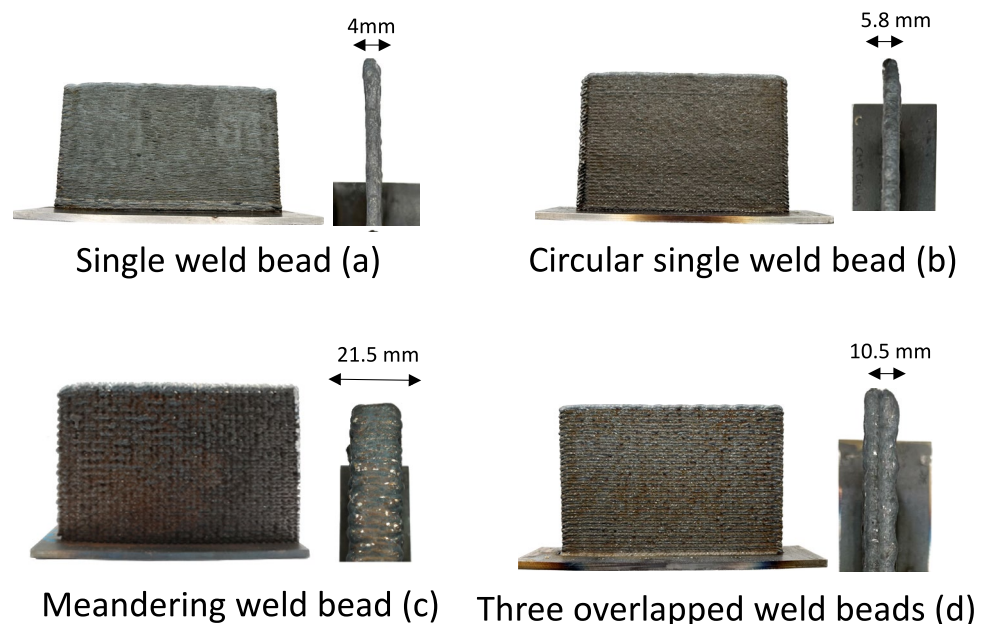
Front view and top view of the manufactured WAAM walls: a single weld bead, b circular single weld bead, c meandering weld bead, and d three overlapped weld beads
